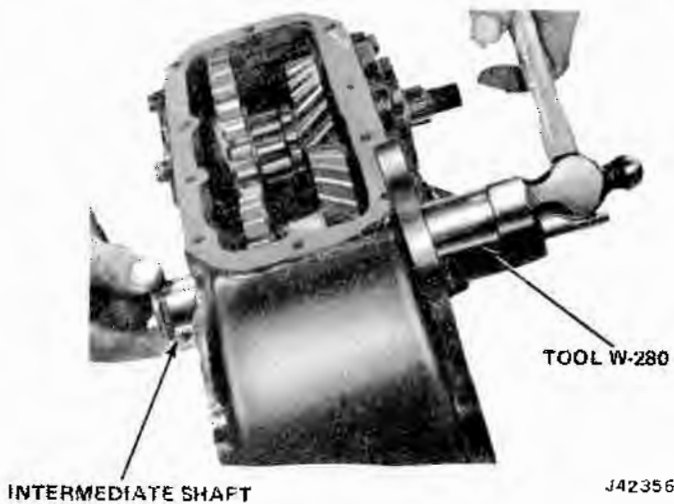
Intermediate Shaft Needle Bearing Aligner
